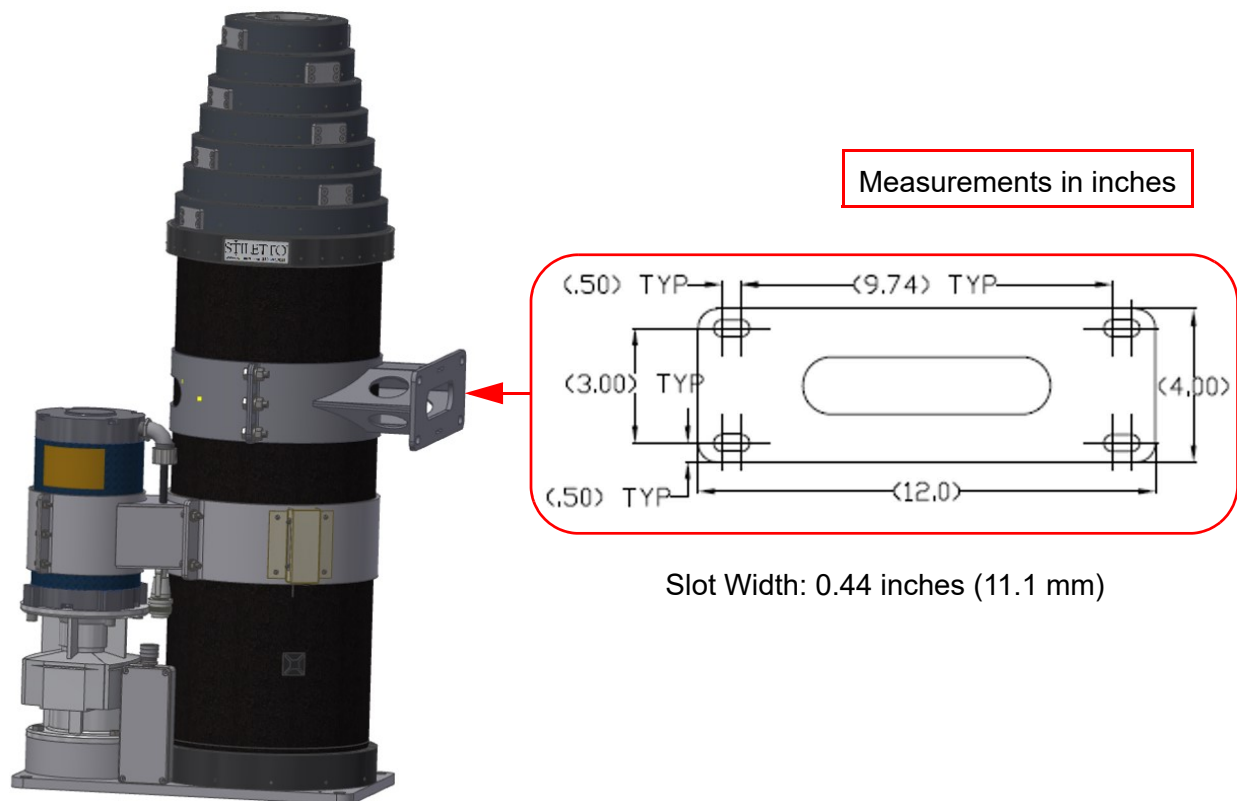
Support Bracket Assembly Bolt Hole Pattern (not to scale)
